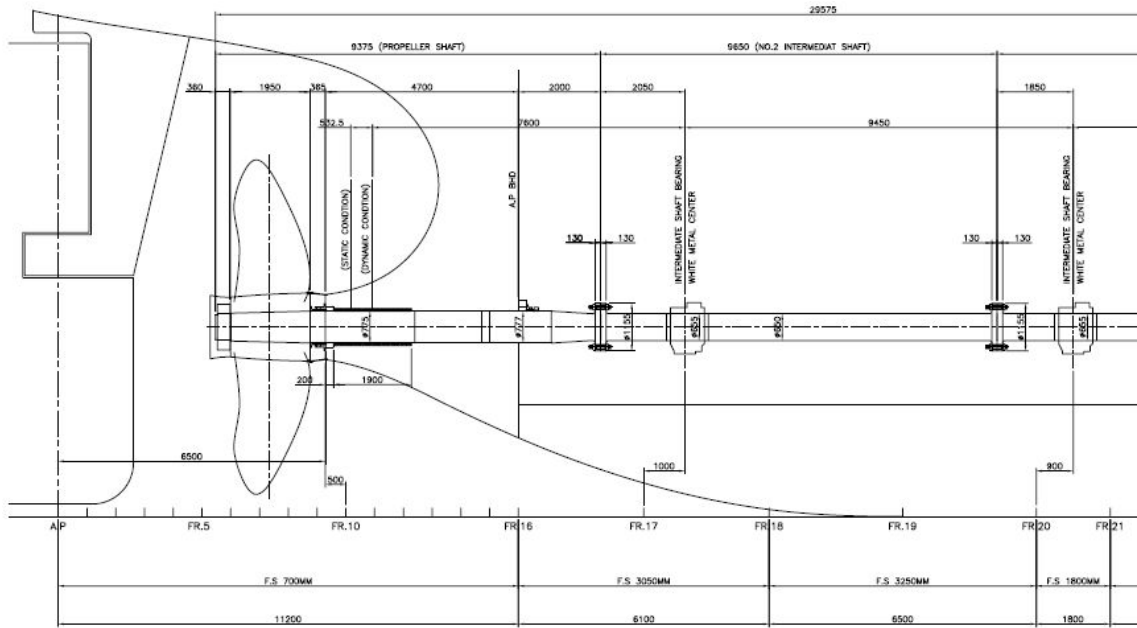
Shaft arrangement that forward stern tube bearing is installed
